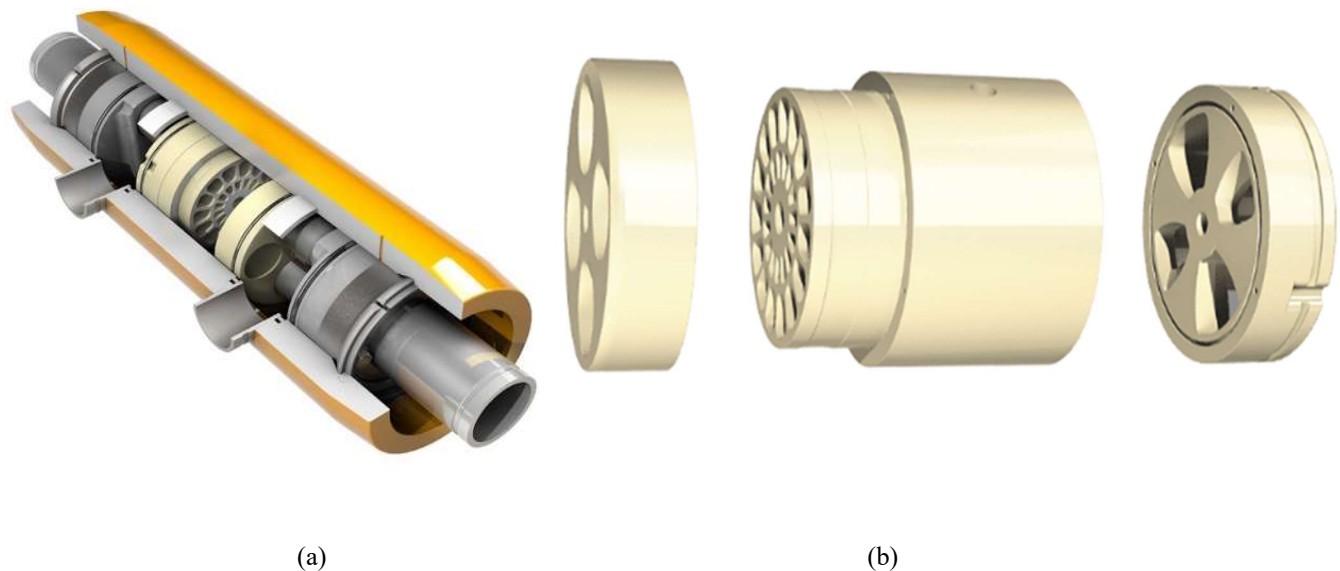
Rotary Pressure Exchanger: (a) cut-away view of PXG with the rotor at its centre, and (b) exploded view of the device
